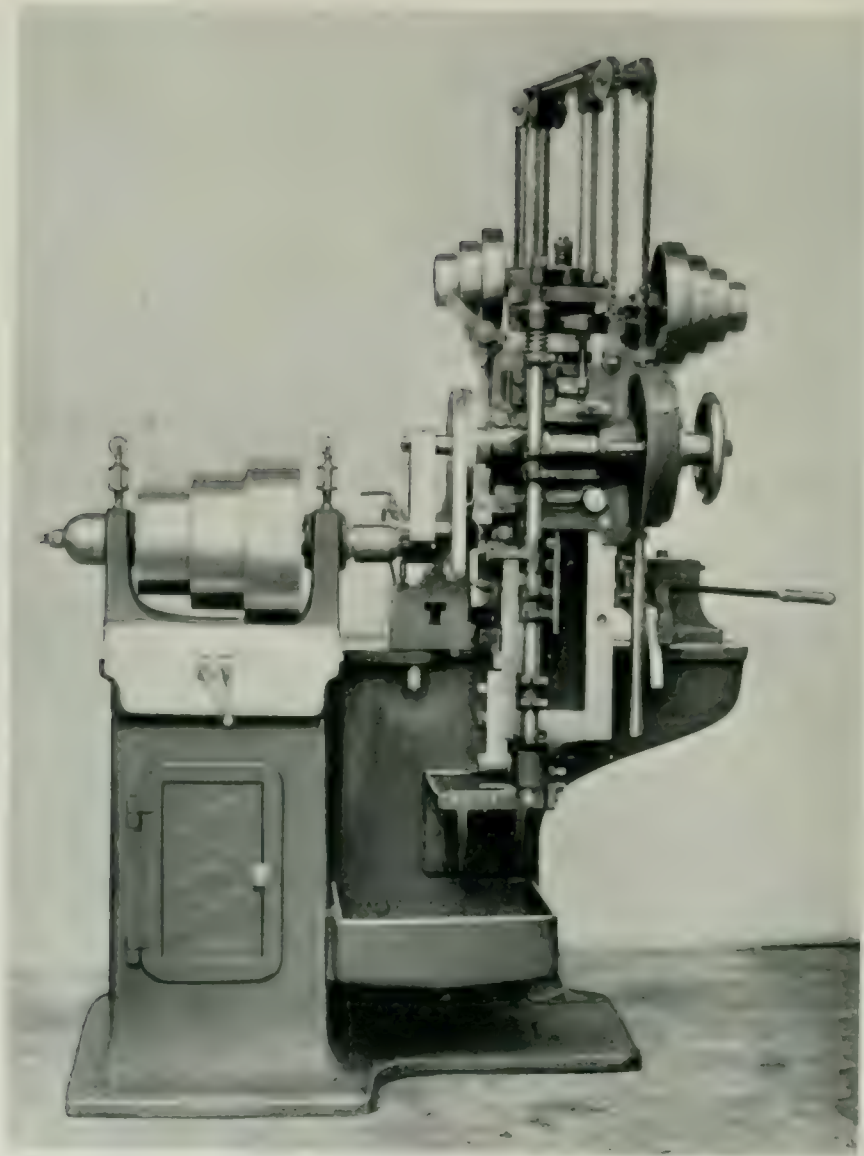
VERTICAL PROFILE MILLING MACHINE.
